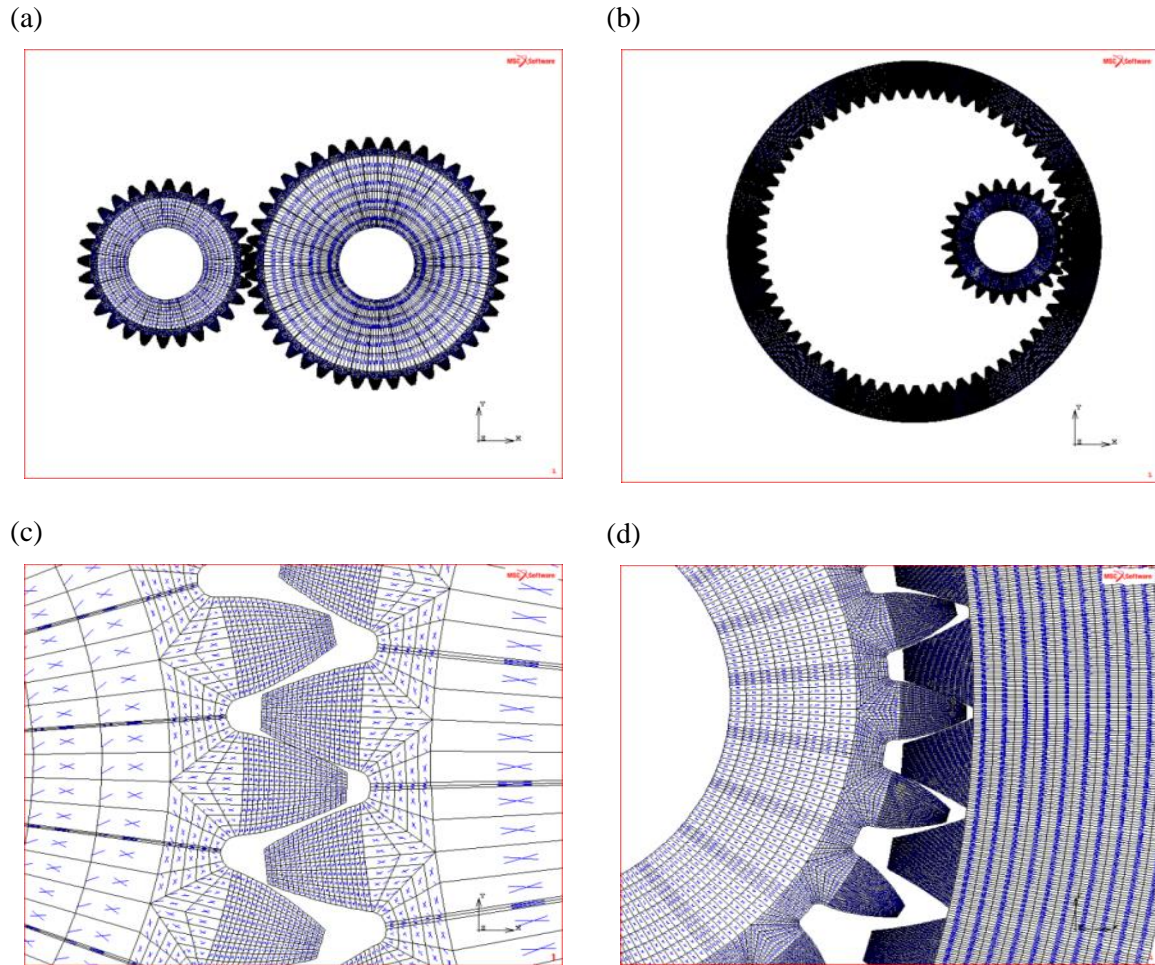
Finite element model gear meshes: a: external gears, b: internal gears, c: external gear teeth meshes, d: internal gear teeth meshes.
